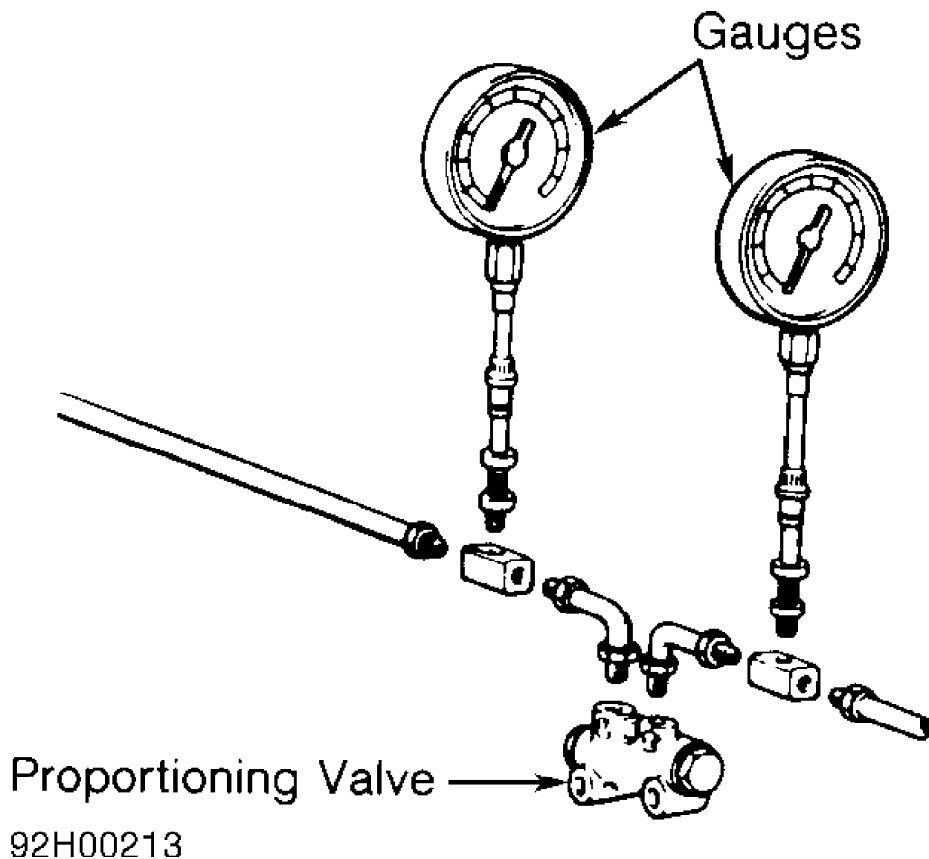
Connecting Pressure Gauges To Proportioning Valve (Typical)
